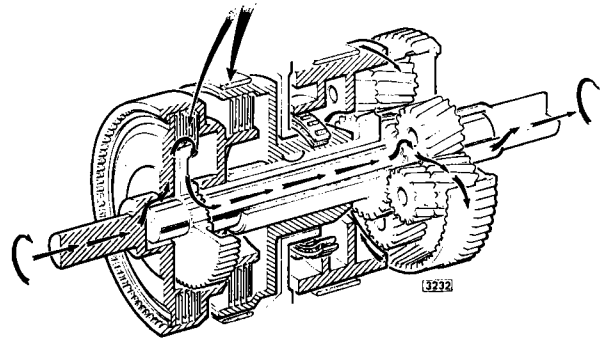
Mechanical power flow — Second gear (Lock-up or Drive 2) selected
